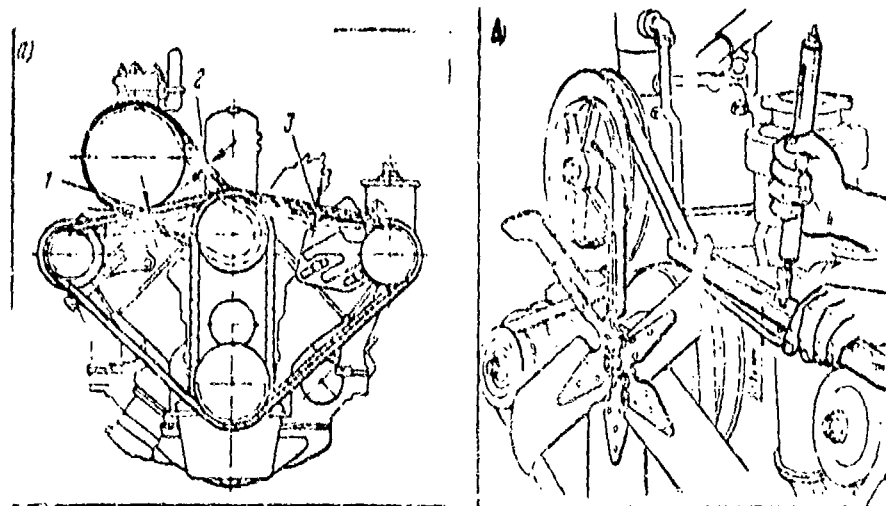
Location diagram and method of checking engine drive belt tightness:
